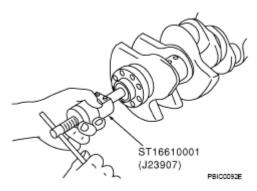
Using SST To Remove Rear End Of Crankshaft Courtesy of NISSAN MOTOR CO., U.S.A.
